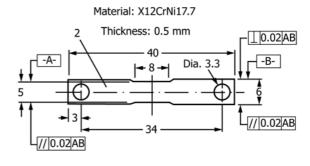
Fixtures for Attachment of the δ_{5} Clip Gage to Compact Specimen
